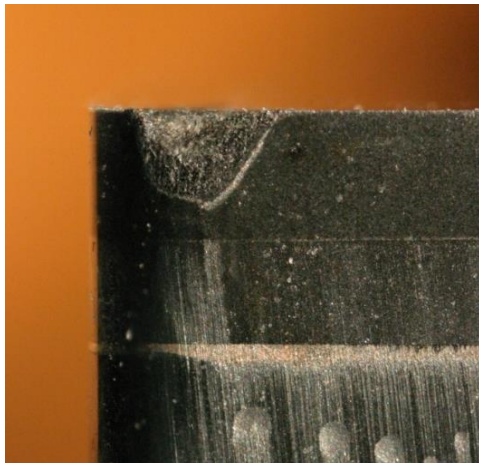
Flank wear of PCD inserts under following cutting conditions
